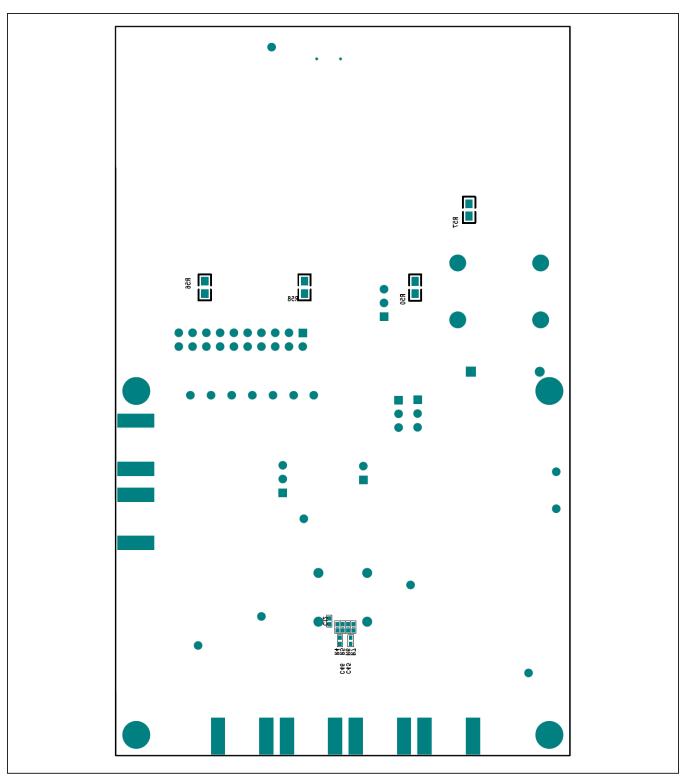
MAX2870/MAX2871 EV Kit Component Placement Guide—Solder Side
